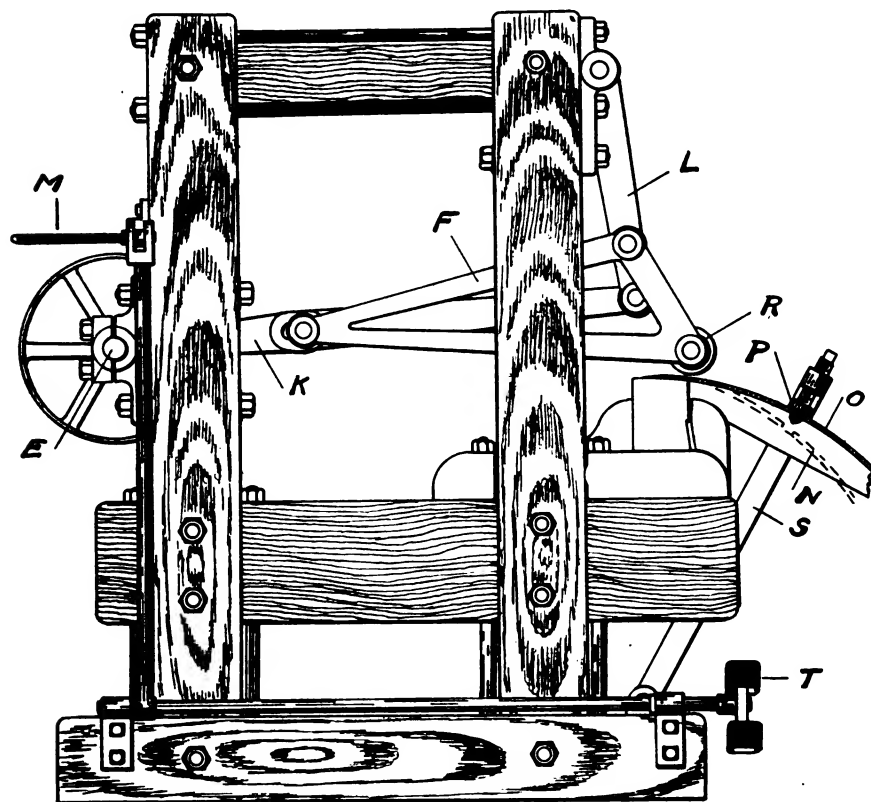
SHOWING SIDE VIEW OF THE MACHINE WITH DISC IN PLACE FOR SHARPENING
